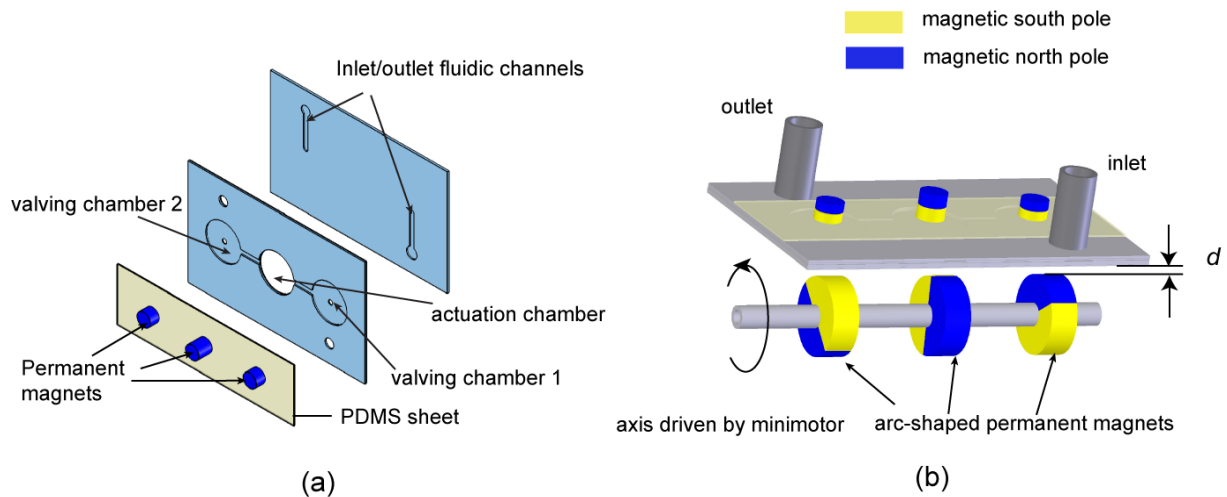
(a) Explosion view of the active-valve micropump and (b) the principle of magnetic actuation.
